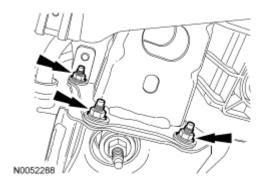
Identifying RH Catalytic Converter Support Bracket Bolts Courtesy of FORD MOTOR CO.
